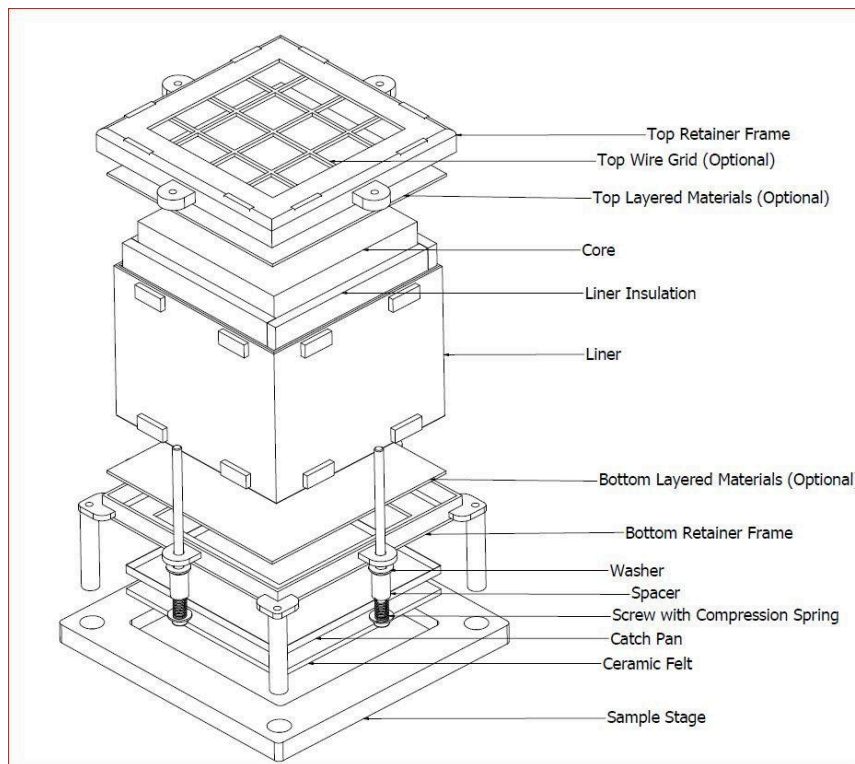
Schematic drawing showing the test sample holder used in the Cube test.
